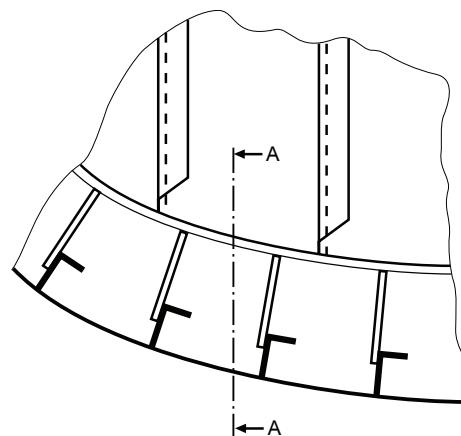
Other bracket arrangement at lower end of secondary stiffeners on plane bulkhead
